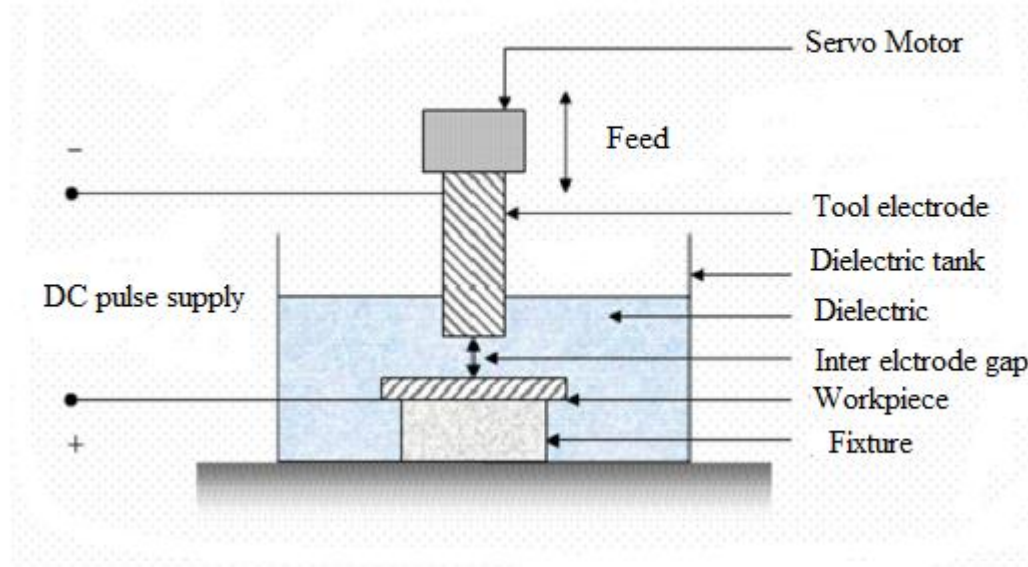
2: Schematic of an Electric Discharge Machining (EDM) machine
